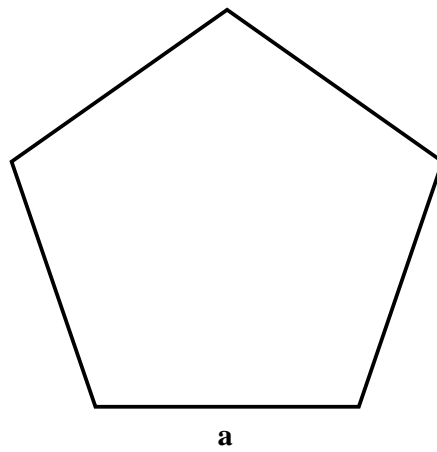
(b) Die Orifice dimensions used to extrude pentagonal section
